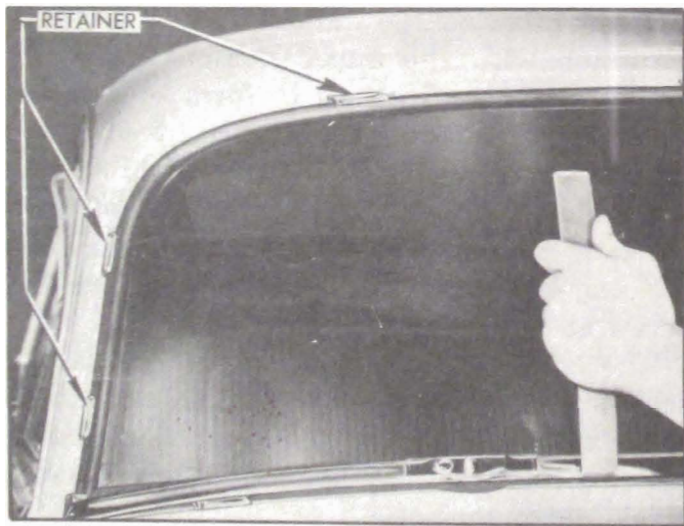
Removal of Reveal Molding—1949 Series 50-70
